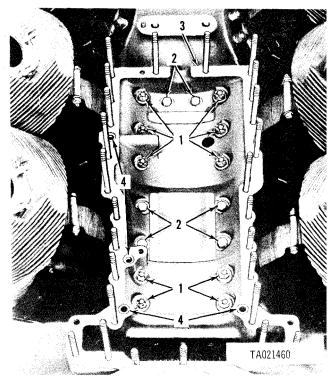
Removing or installing rear fan and accessory drive housing assembly.
